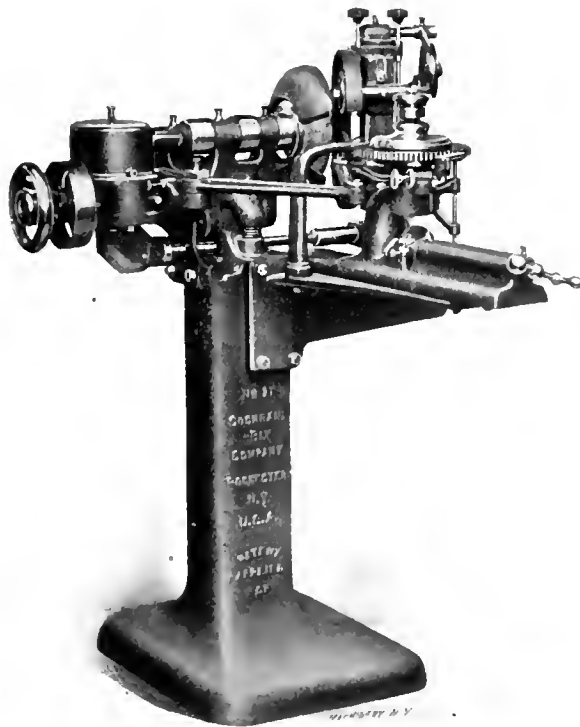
A Machine for Automatically Sharpening and Beveling Metal-cutting Saws.
